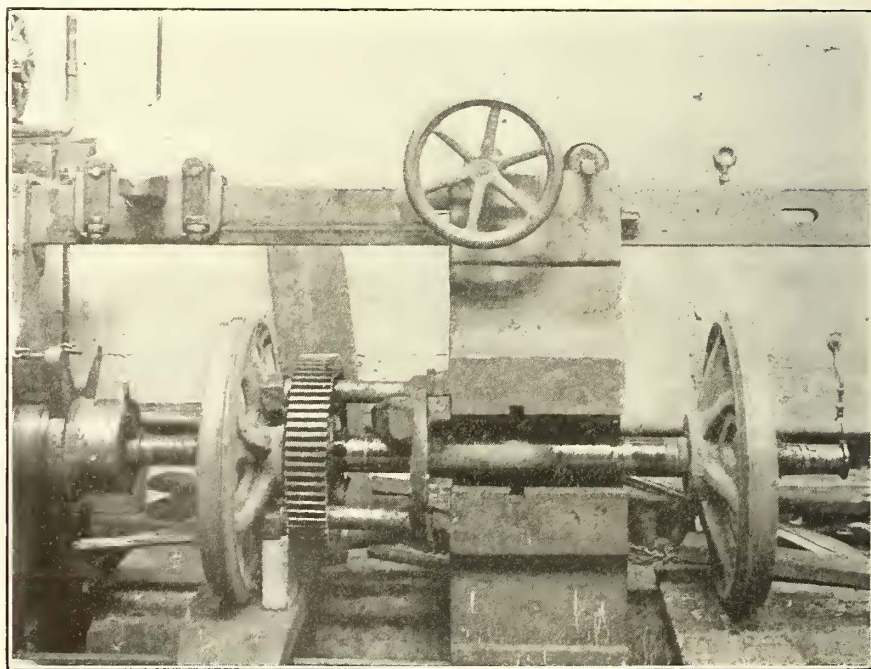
Syracuse Shops—Pressing Off a Car Wheel Without Disturbing the Gear
